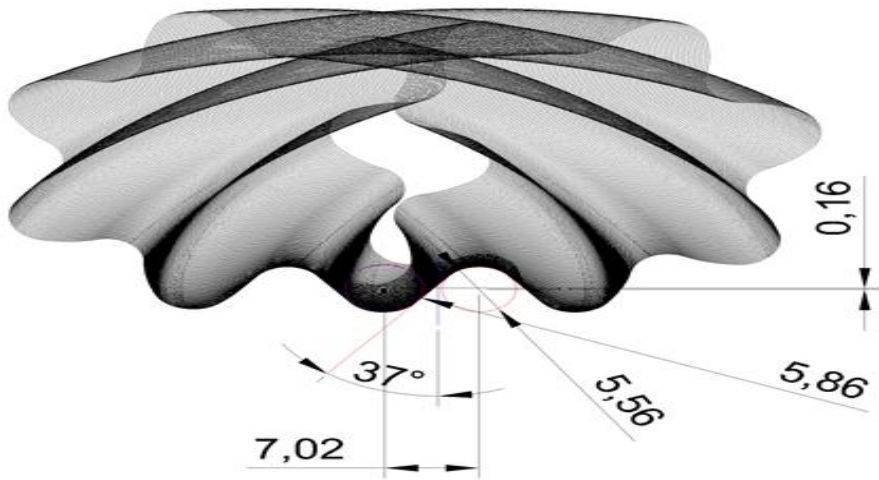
Standard Helical Gear Measured With a 3D Measuring Machine (Using 2D CAD)
